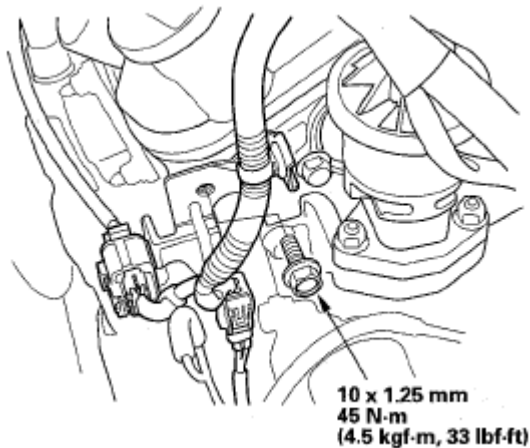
Identifying Connector Bracket Bolt With Torque Specifications
